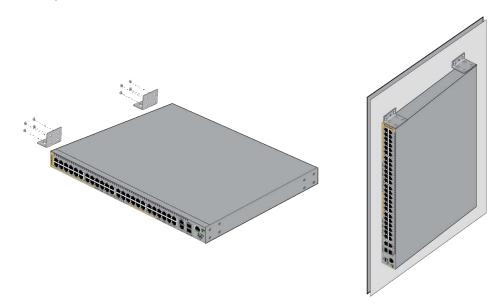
Attaching the Wall/Equipment Rack Brackets to the x330-52GTX Switch
